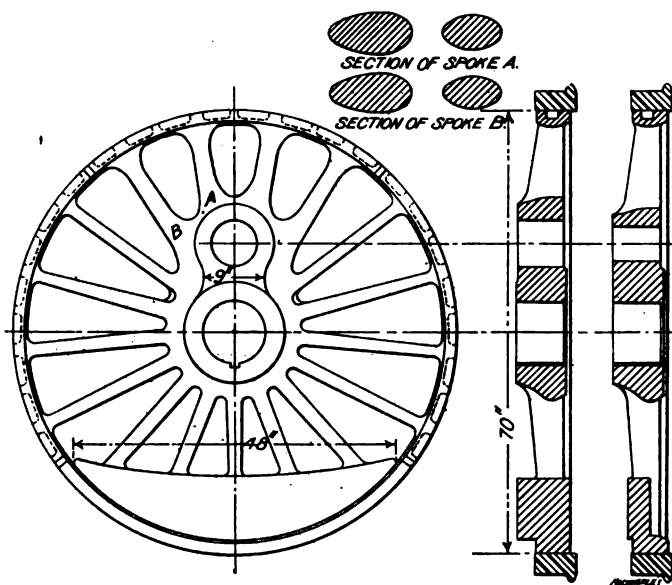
Cast Steel Driving Wheel Center for Atlantic Type Locomotive.
